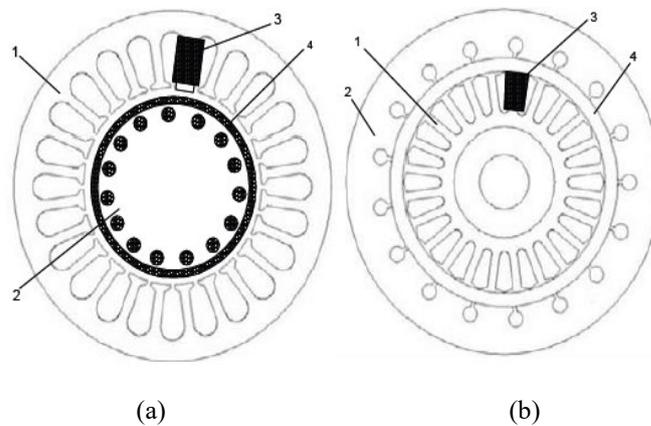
Construction of a written-pole machine: (a) with inner rotor (b) with outer rotor.
